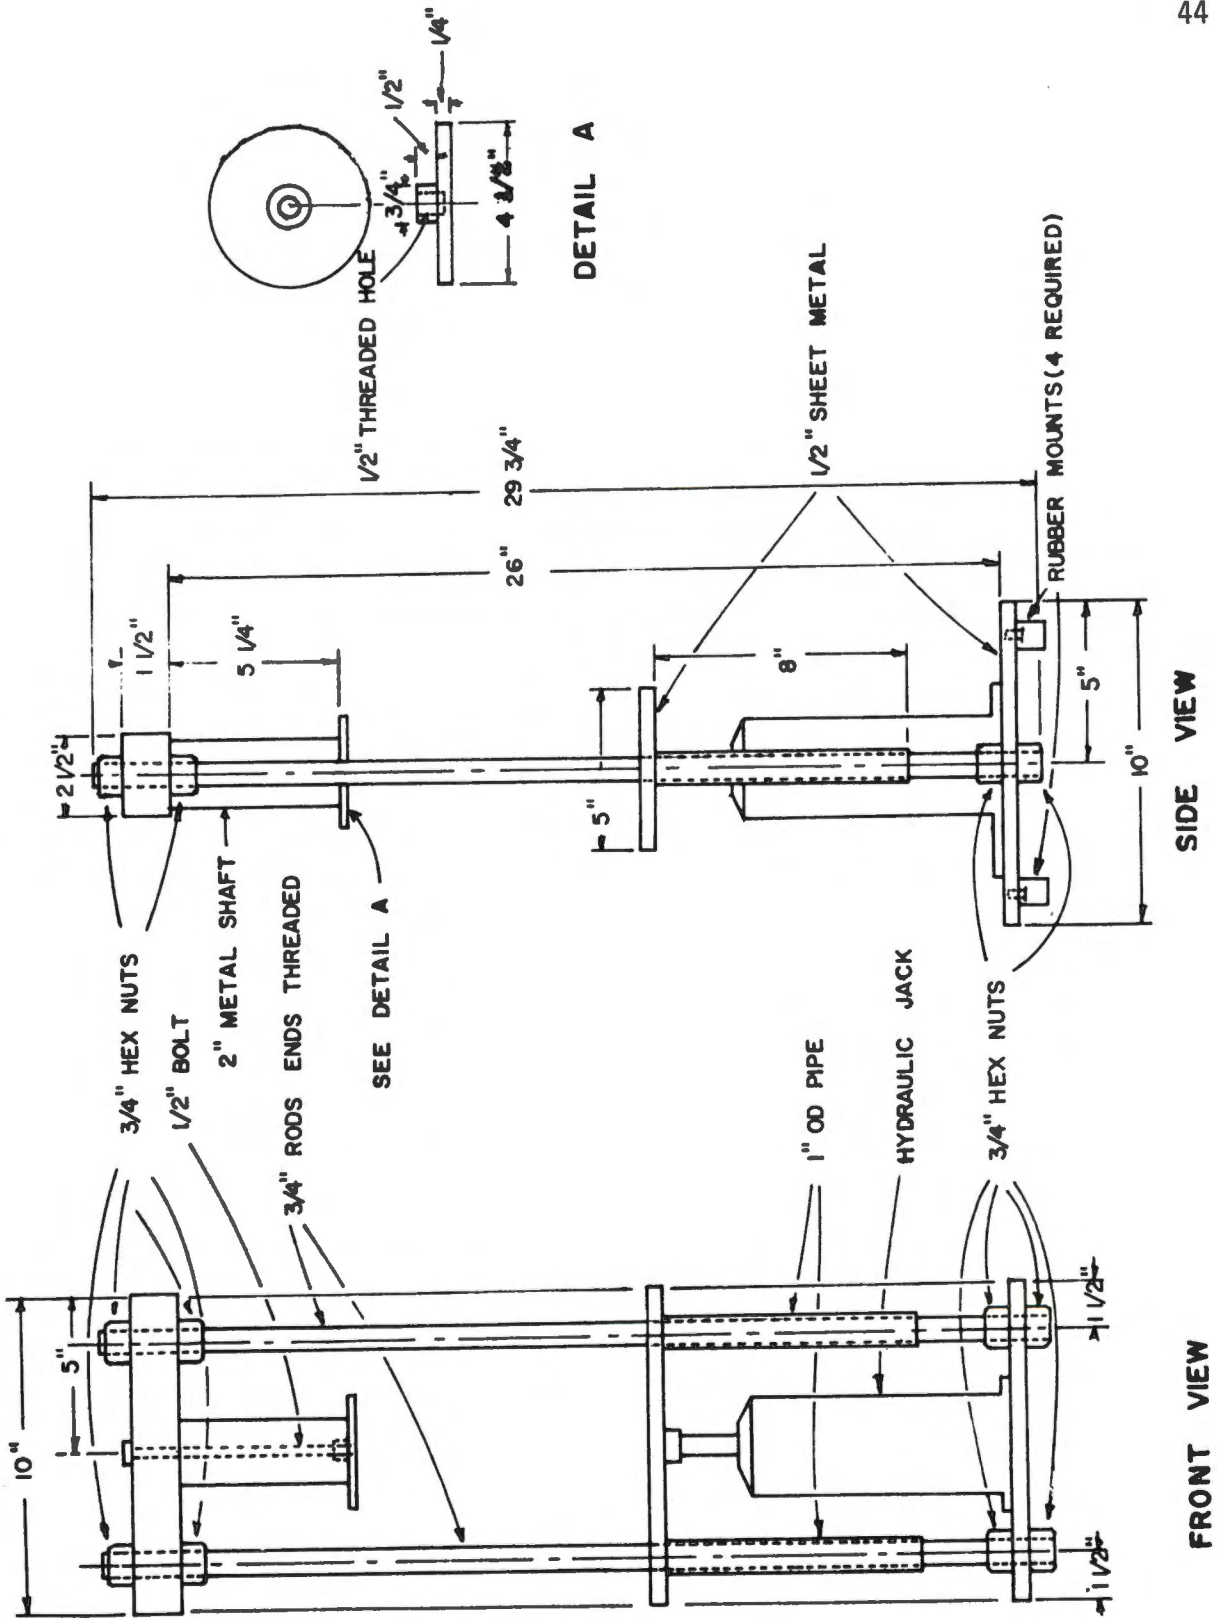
Drawing of Hartstack's compression device for hay samples.
